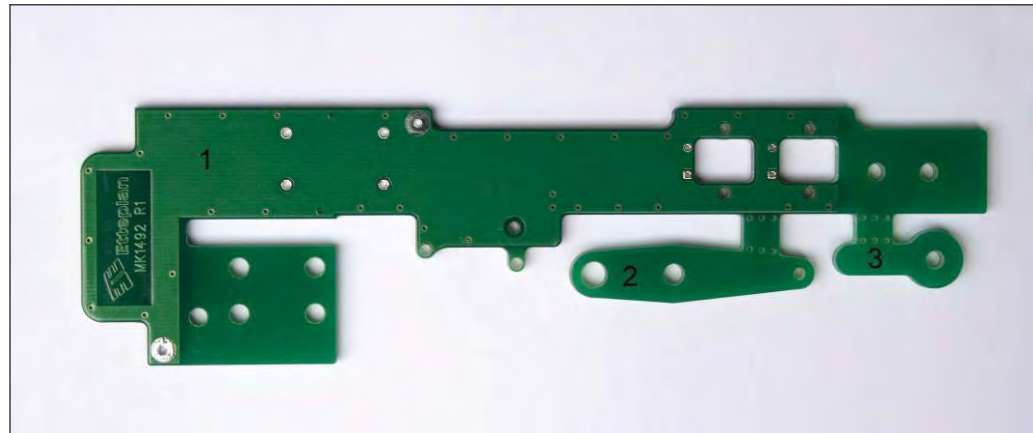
The spare parts of the mechanical parts kit KK1492. 1) Power Supply Connector, KK1492-1, 2) RF Connector, KK1492-2 and 3) LCD stop, KK1492-3.
